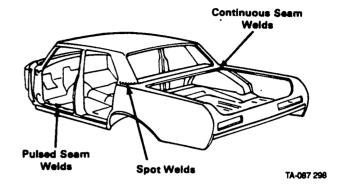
Automotive Body Sections Assembled With Continuous Seam, Pulsed, And Spot Welds
